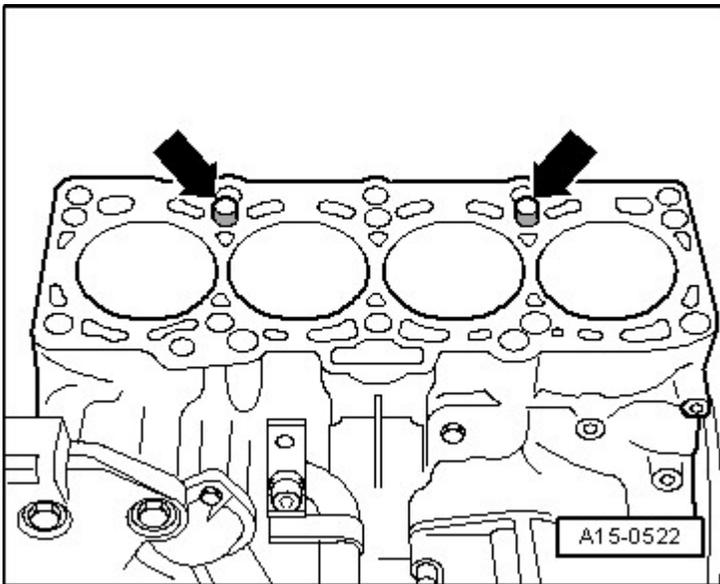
Identifying Alignment Bushings -Arrows- In Cylinder Block
